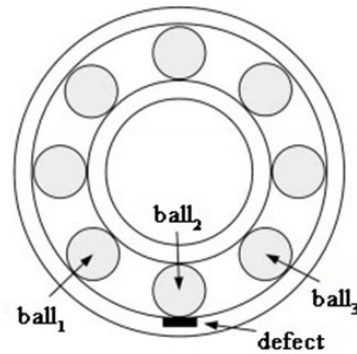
Ball bearing with a defect in the outer ring
